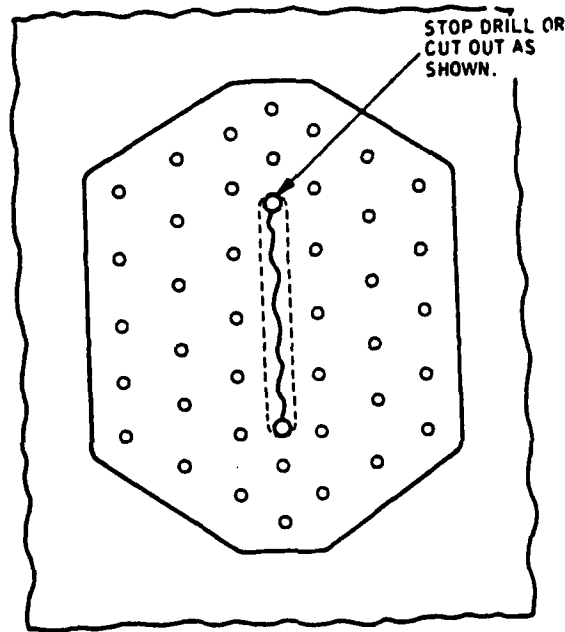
Example of a riveted repair performed on a cracked aluminum sheet [3].
